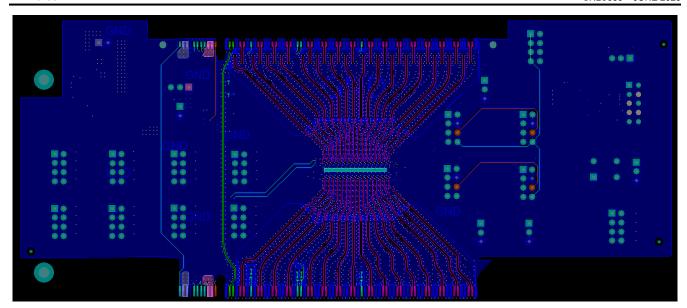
Bottom Layer View of TI PCIe Riser Card Using DS320PR1601 with CEM Connectors
